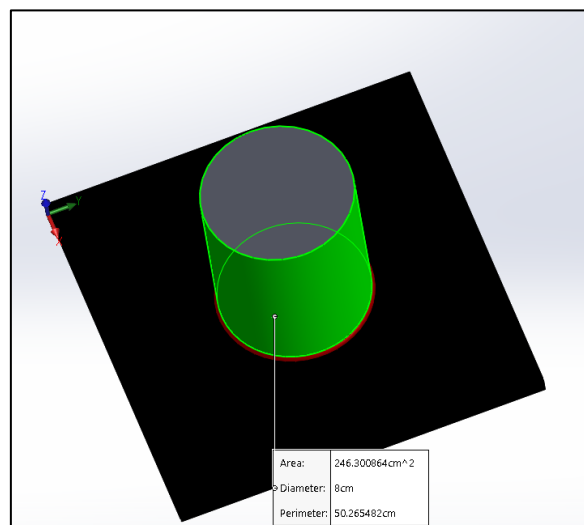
Cylinder Diameter Which is Represent the Welding Path Diameter.
